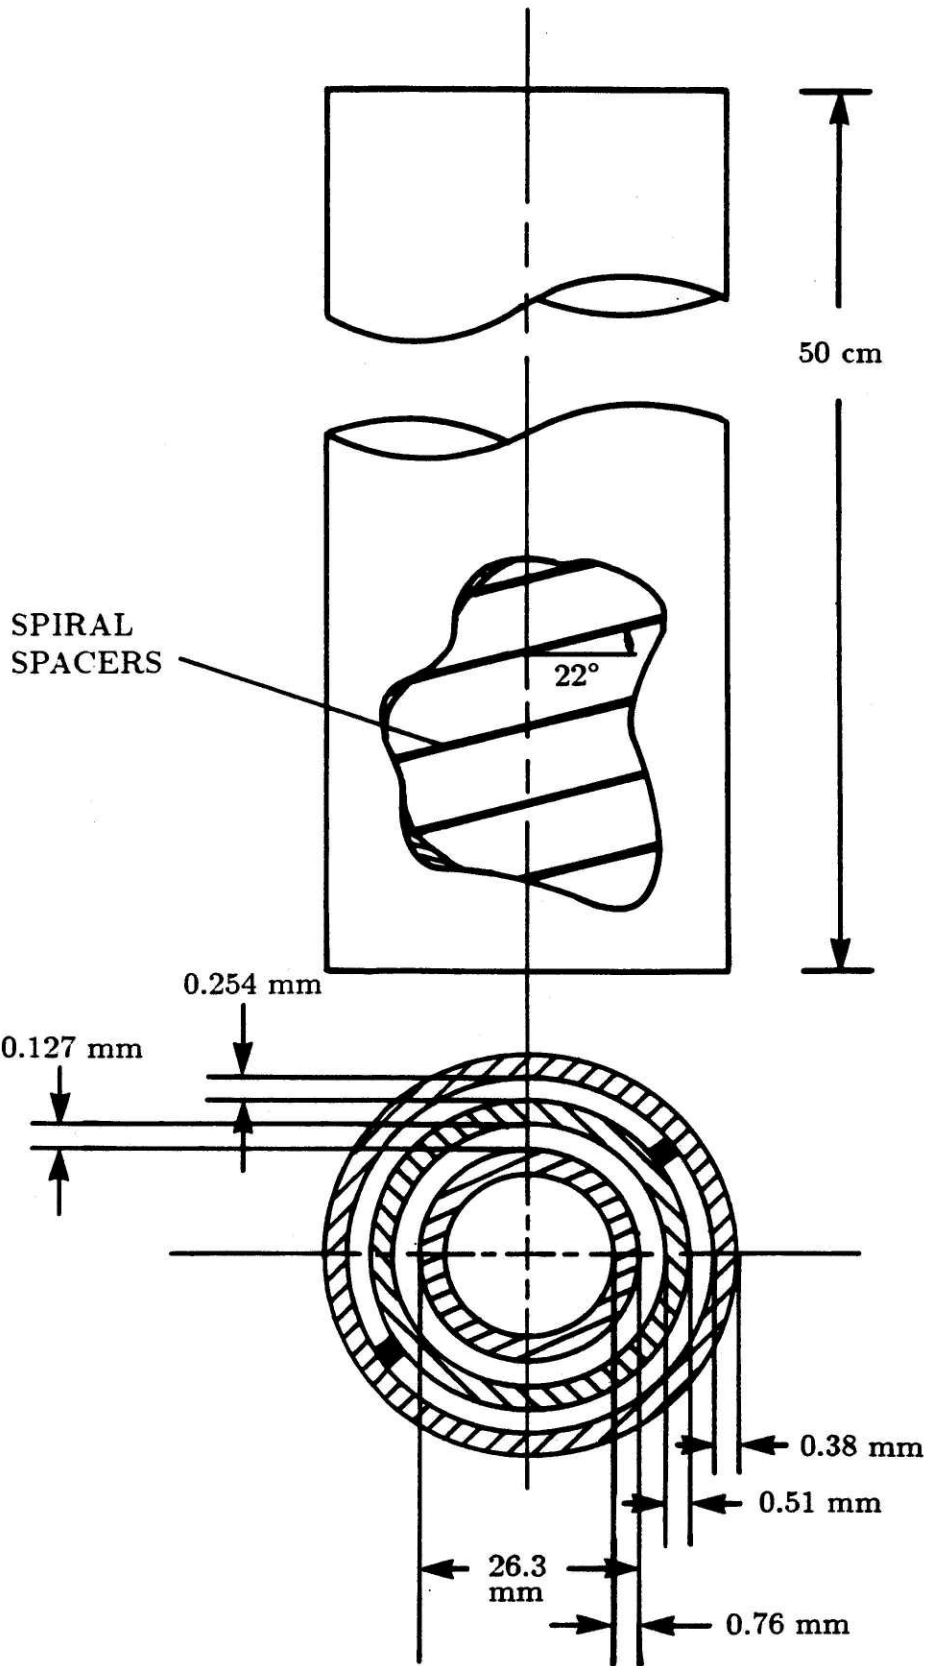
Dimensional specifications for the concentric tubes and spiral spacers.
